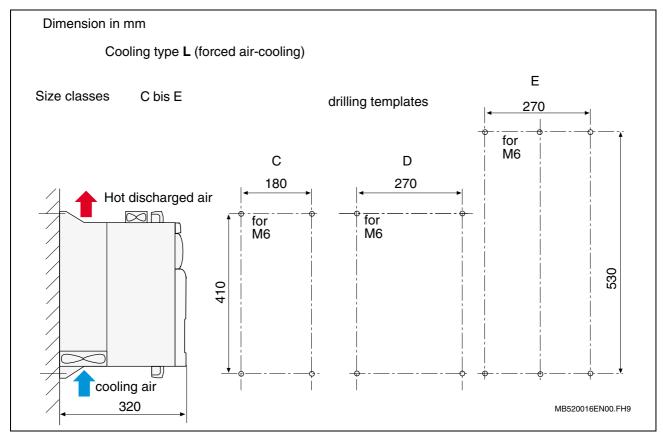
Dimension sheet for cooling type L, size classes C, D, E
